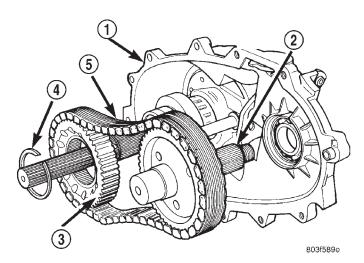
Front Output Shaft, Drive Gear And Chain Removal
